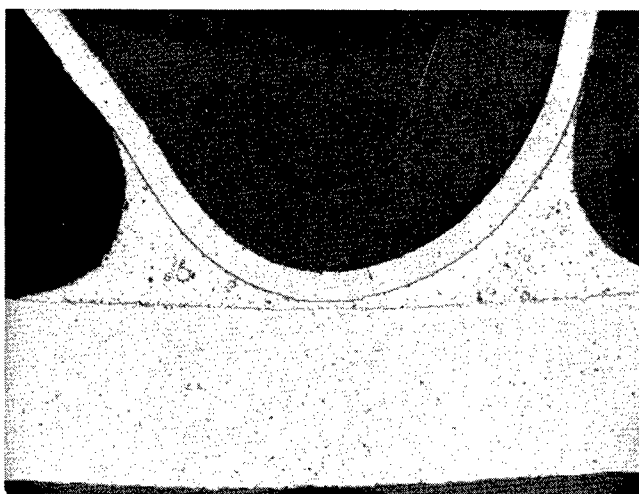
TYPICAL HEAT RECEIVER TUBE SECTIONS; Brazed and Prepared for Long-Term Aging
